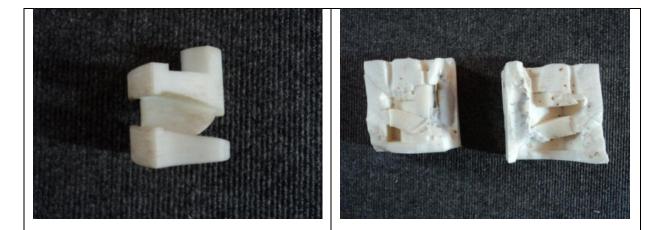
Section of Francis RunnerFig. 22Silicone Rubber Mould of Sectiondeveloped from Rapid Prototype Machineof Francis Runner
